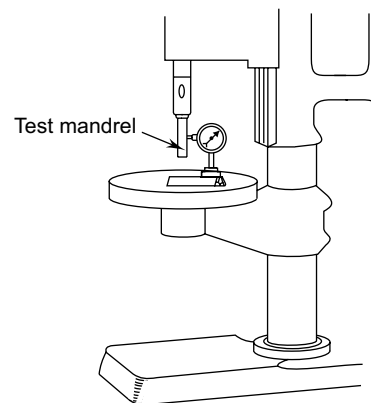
Test setup for true running of the spindle of a milling machine
